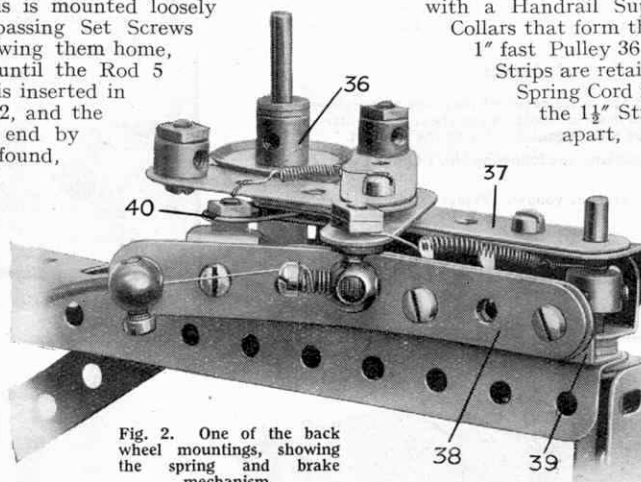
One of the back wheel mountings, showing the spring and brake mechanism.
